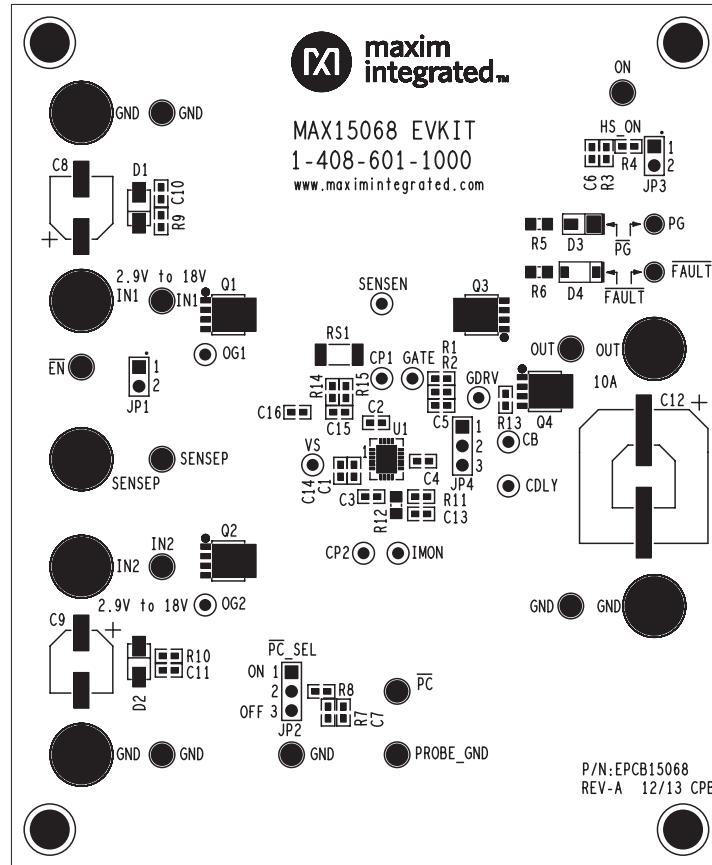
MAX15068 EV Kit Component Placement Guide—Component Side
